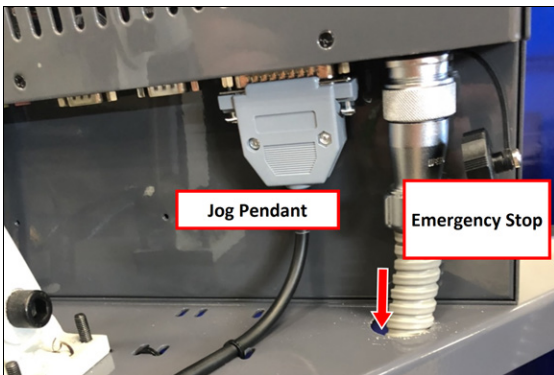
Jog pendant (left) and Emergency Stop (right) cables connected.
